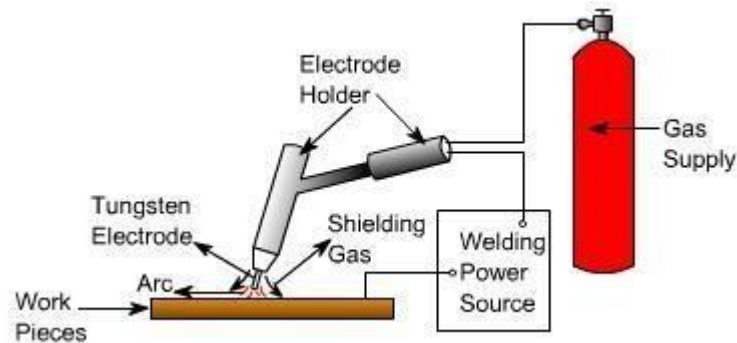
Schematic Diagram of TIG Welding System.
